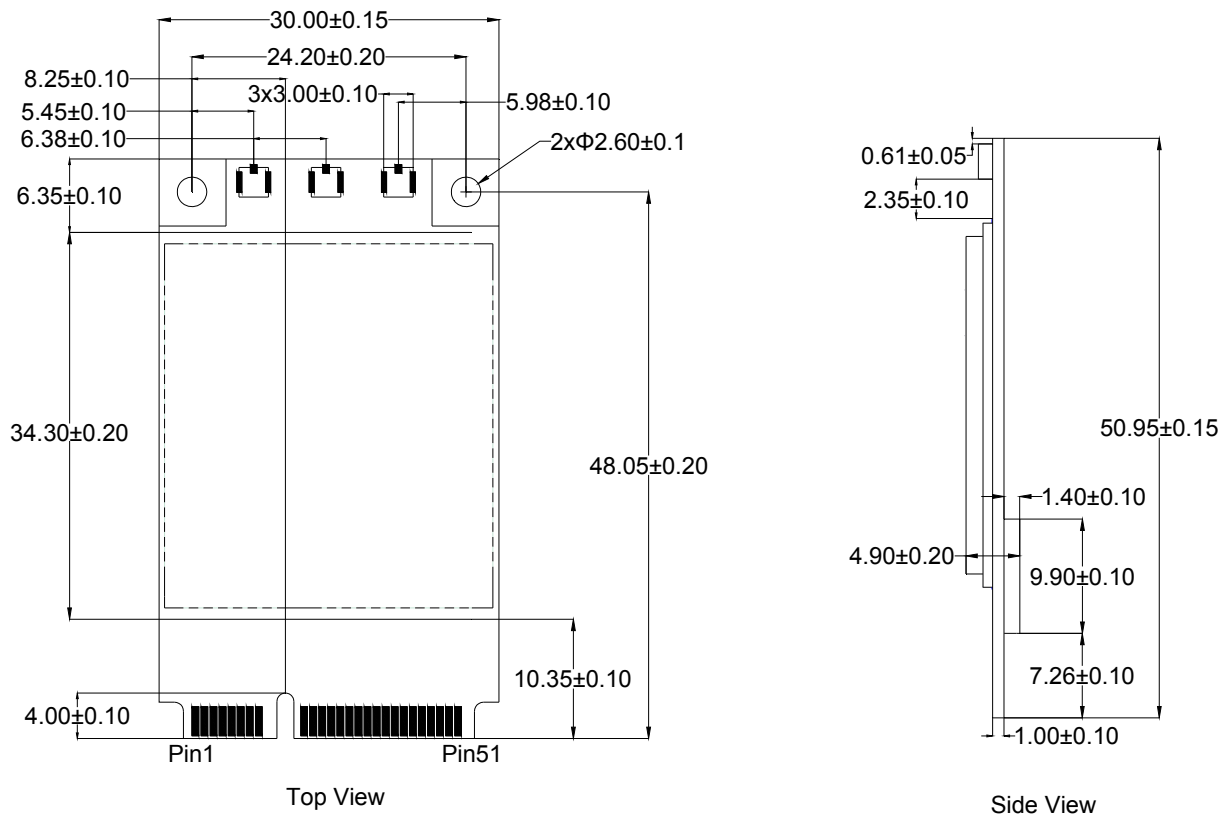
Mechanical Dimensions of EC21 Mini PCIe
